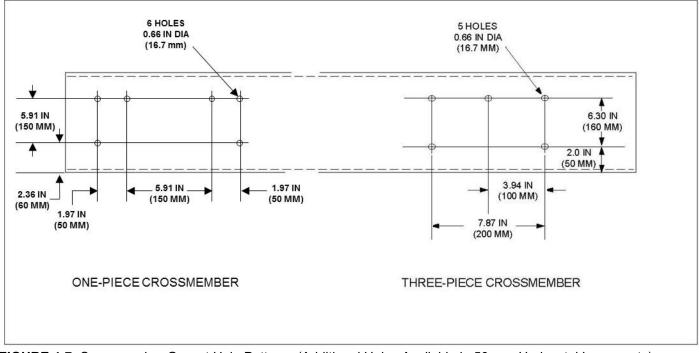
Crossmember Gusset Hole Patterns (Additional Holes Available in 50 mm Horizontal Increments)
